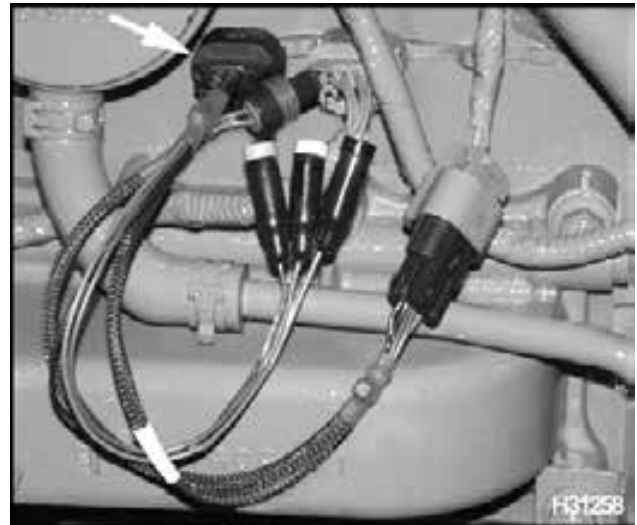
VC Gasket Breakout Harness connector to pass-through connector for ICP sensor
